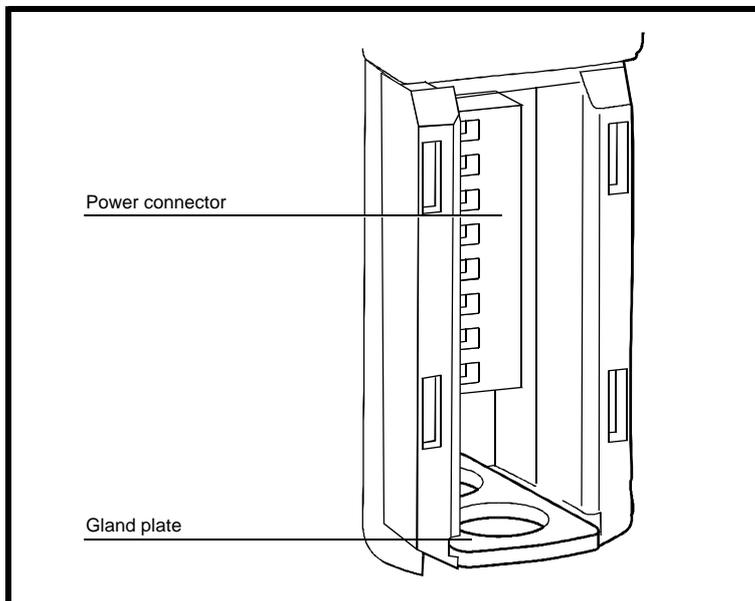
Filter terminal chamber with gland plate installed prior to cabling
